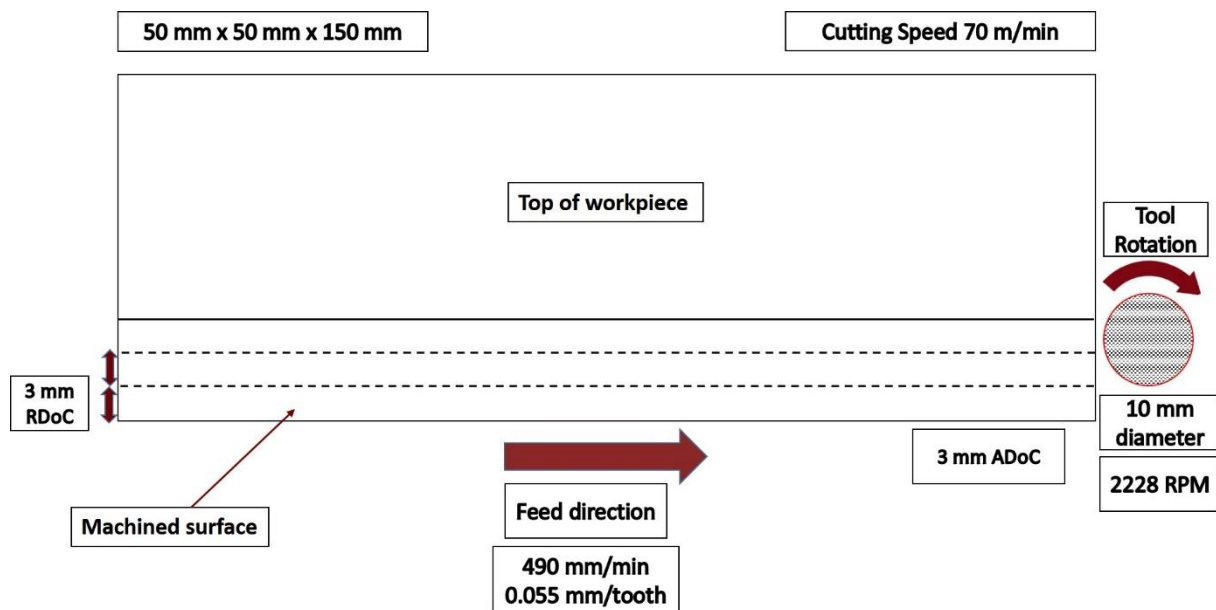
An illustration of the machining method used on Ti-6Al-4V using 4-flute end-mill
